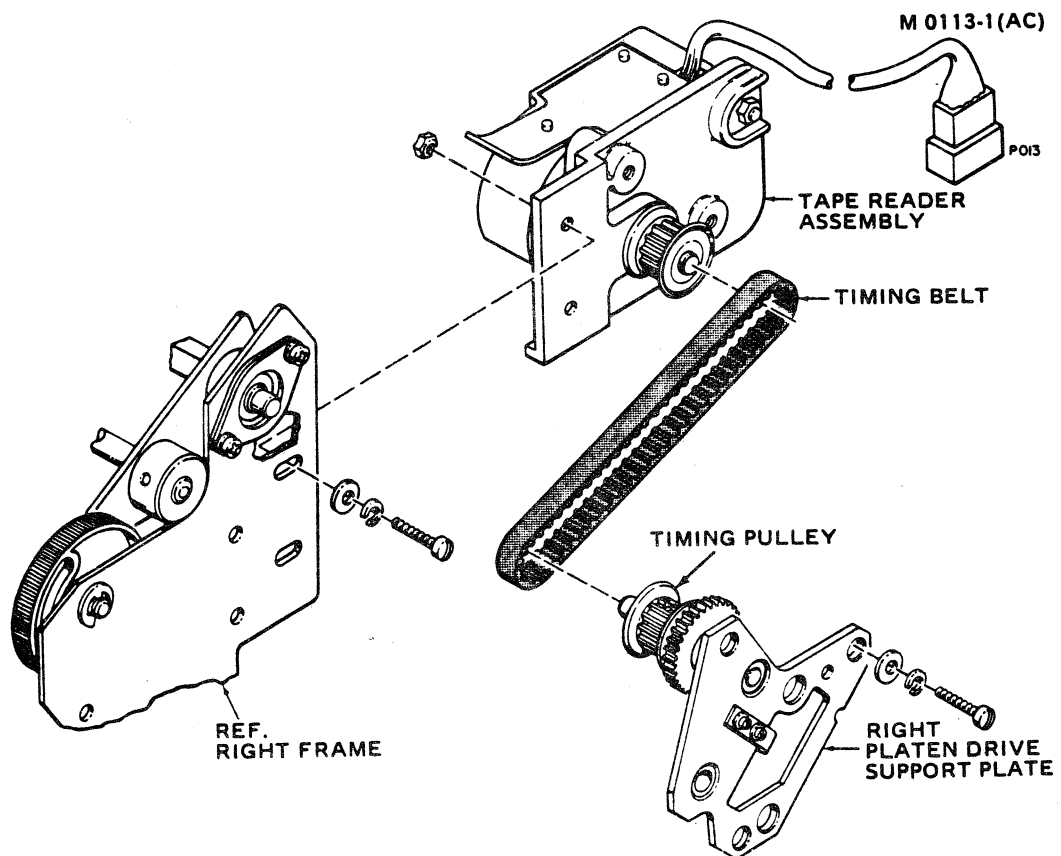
VFU TIMING BELT REMOVAL/REPLACEMENT
